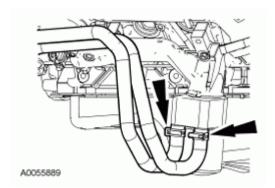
Locating Oil Cooler Coolant Hoses Clamps Courtesy of FORD MOTOR CO.
